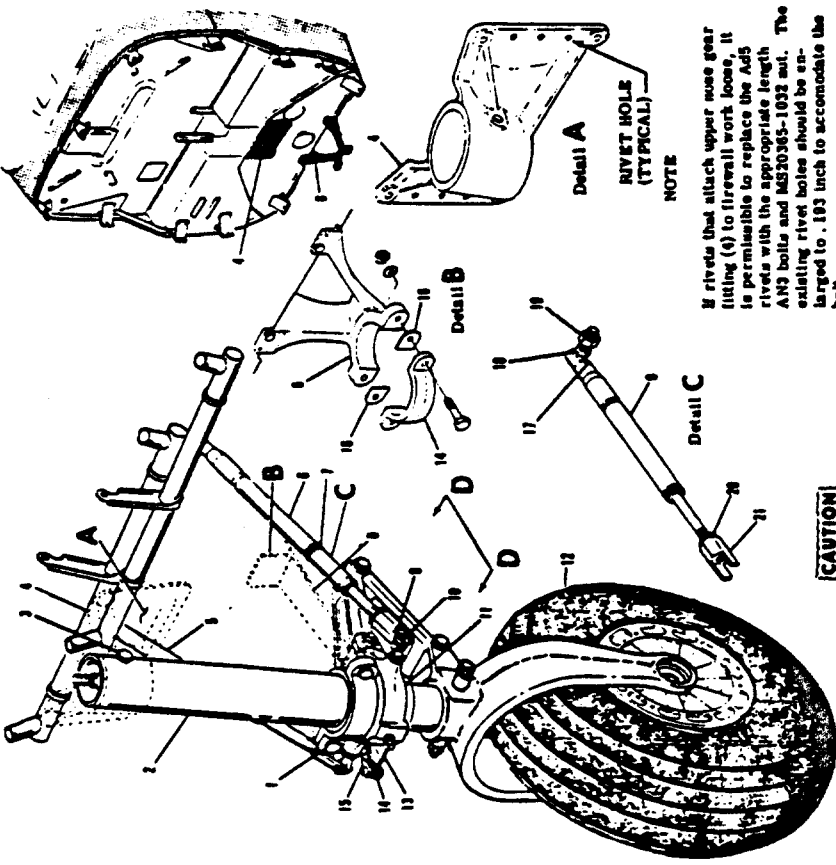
85b Fixed Nosegear Layout: Piper PA-38-112
